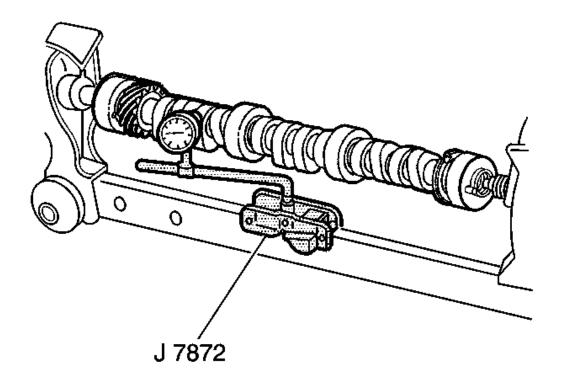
Measuring Camshaft Runout Courtesy of GENERAL MOTORS CORP.
